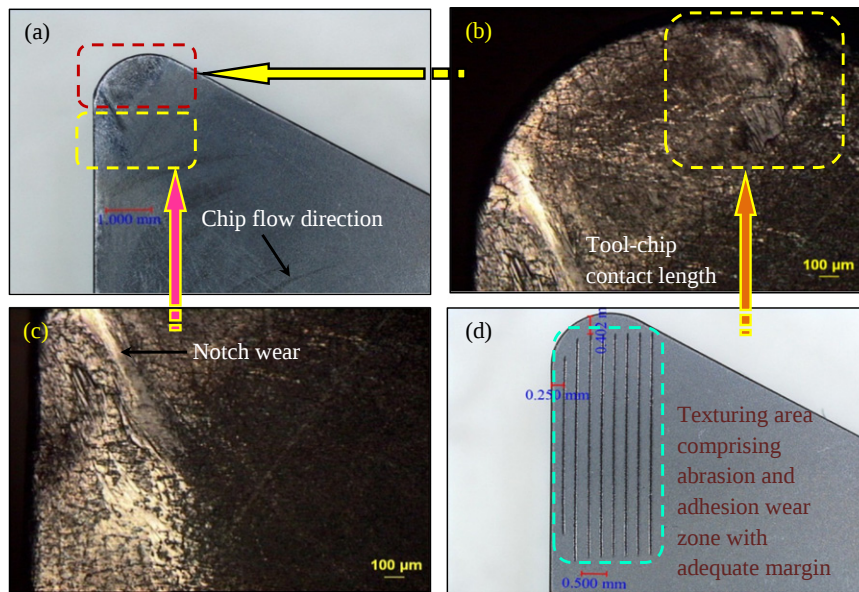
(a) Micrograph showing worn out zones on the un-textured cutting tool rake face, (b) tool-chip contact length region, (c) notch wear formation and (d) selected area for fabrication of micro-textures and (d) fabricated textured tool. Reproduced from Gajrani, K.K., Suresh, S., Sankar, M.R., 2018a. "Environmental friendly hard machining performance of uncoated and MoS_2 coated mechanical micro-textured tungsten carbide cutting tools". *Tribology International* 125, 141–155. doi:10.1016/j.triboint.2018.04.031.
